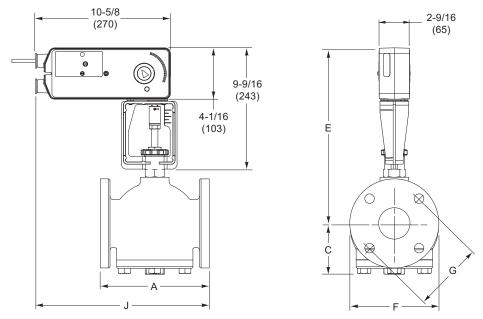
Mx61-720x with 2-1/2" to 4" N.C. 2-Way Flanged Globe Valve.
